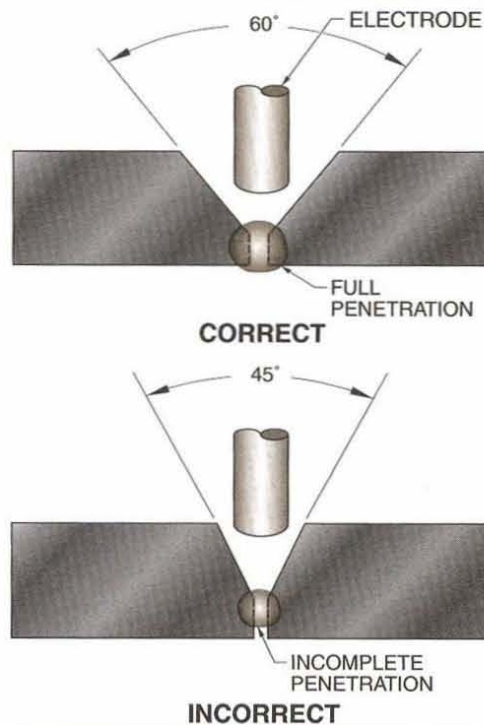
A correct groove angle is essential for a good weld as it allows the weld metal to fully penetrate the root opening.
